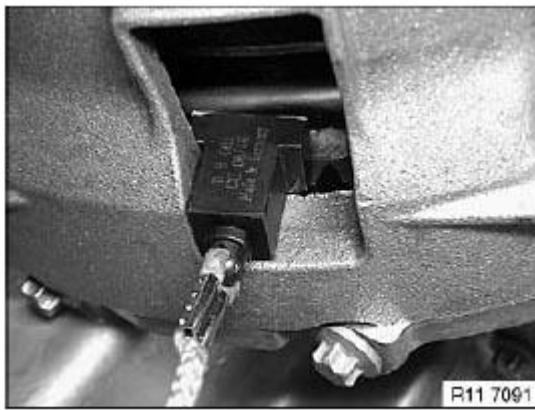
Securing Flywheel (Crankshaft) Using Special Tool 11 8 660
